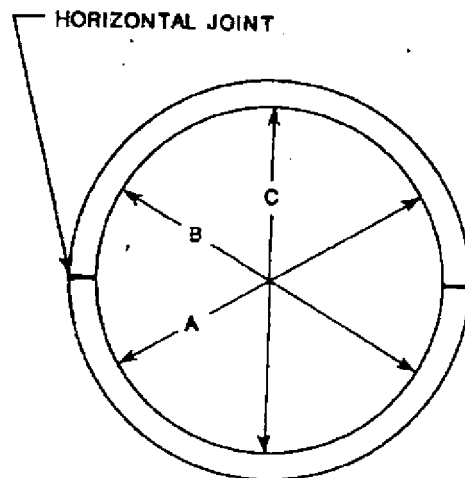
Measuring Points for Wear of Journal Bearings
